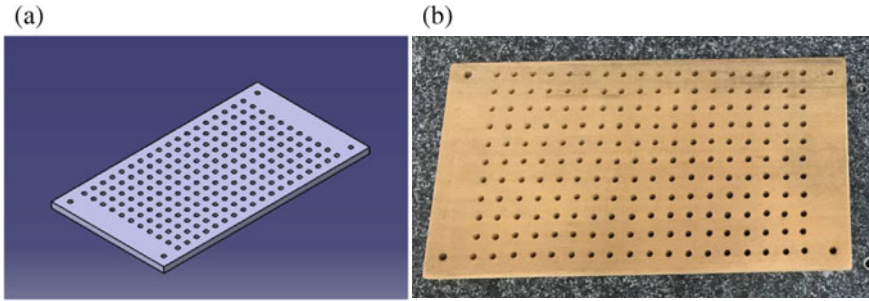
a Three-dimensional design of base plate; b base plate jig
